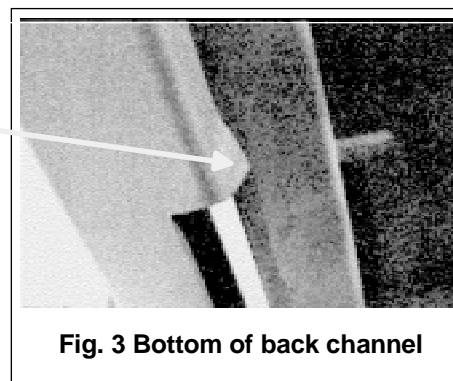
and fig. 3 show the bottom of the back channel. The flange is on the inside of the channel as shown in fig. 2. This flange can also be bent out with a crescent wrench, and should be done after the channel is installed.
